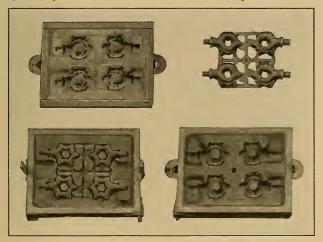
Upper left—hard sand match; right—gated pattern. Lower left—drag mould; right—cope mould.
